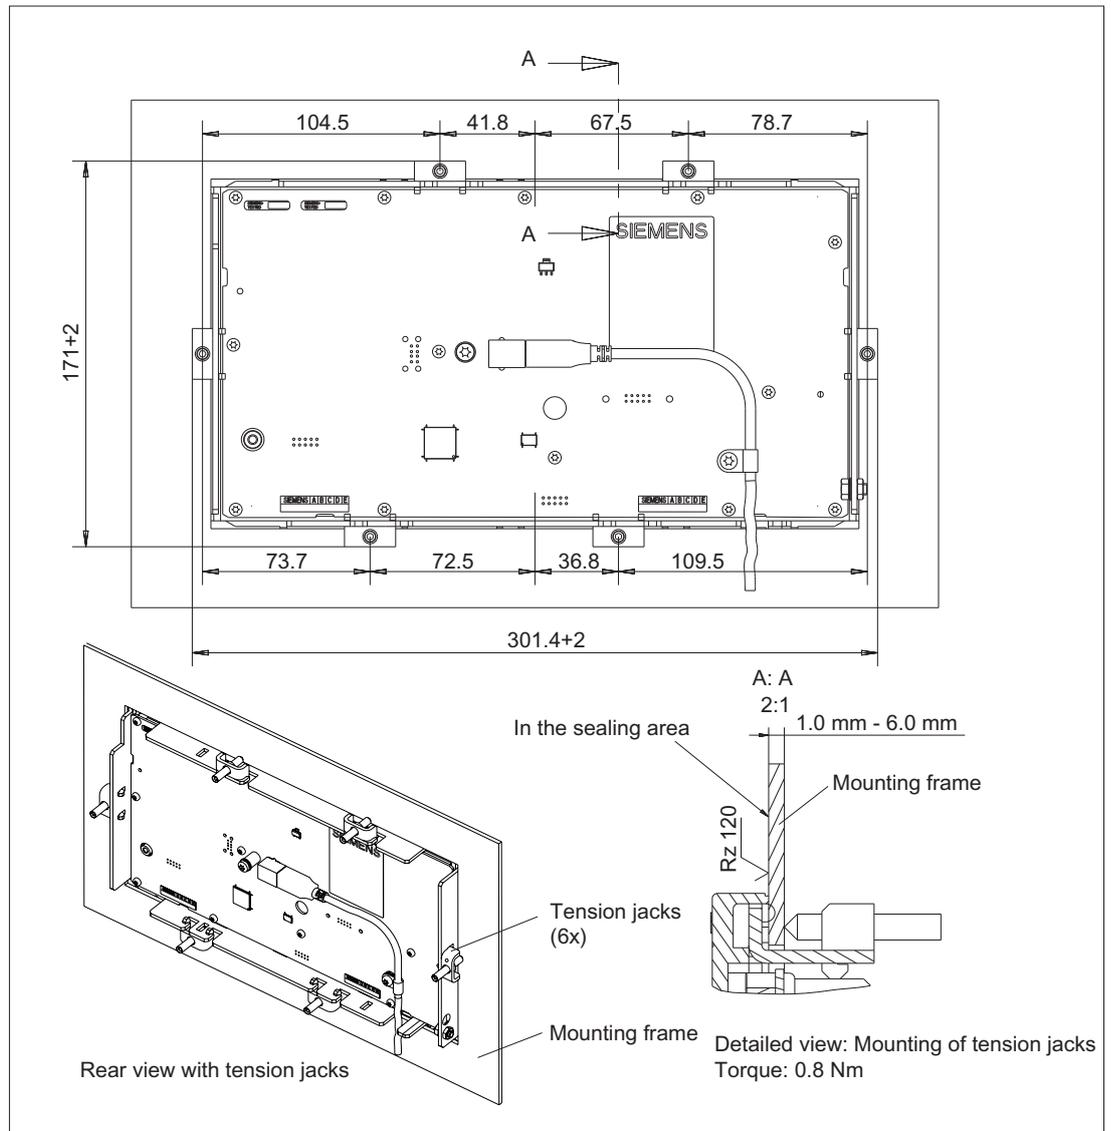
Dimension drawing for mounting the CNC full keyboard KB 310C
